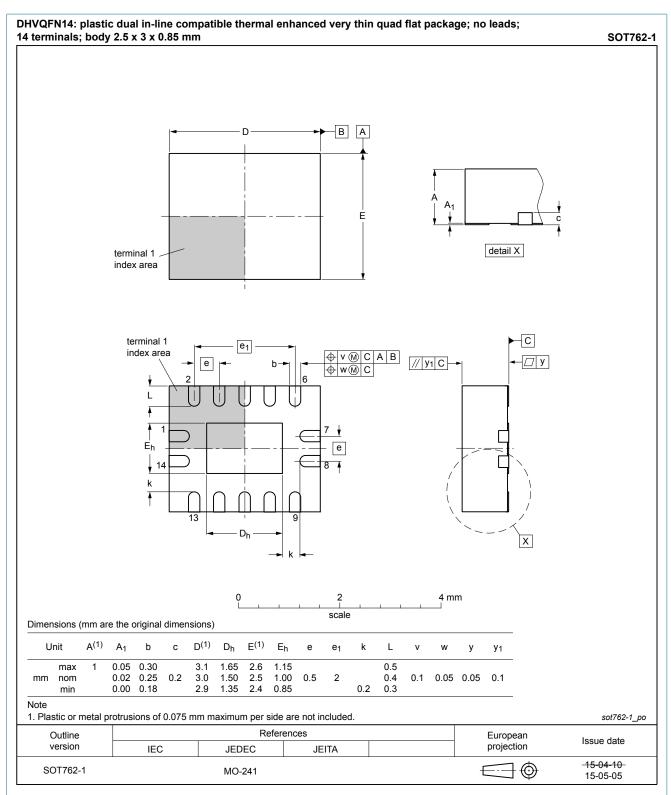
Package outline SOT762-1 (DHVQFN14)
